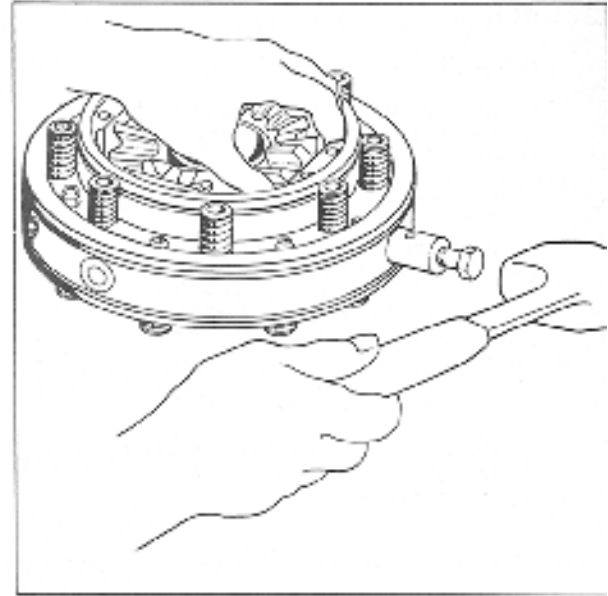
Installation of Bevel Pinion Shaft Using Protective Capscrew (1/4-20 NF).
